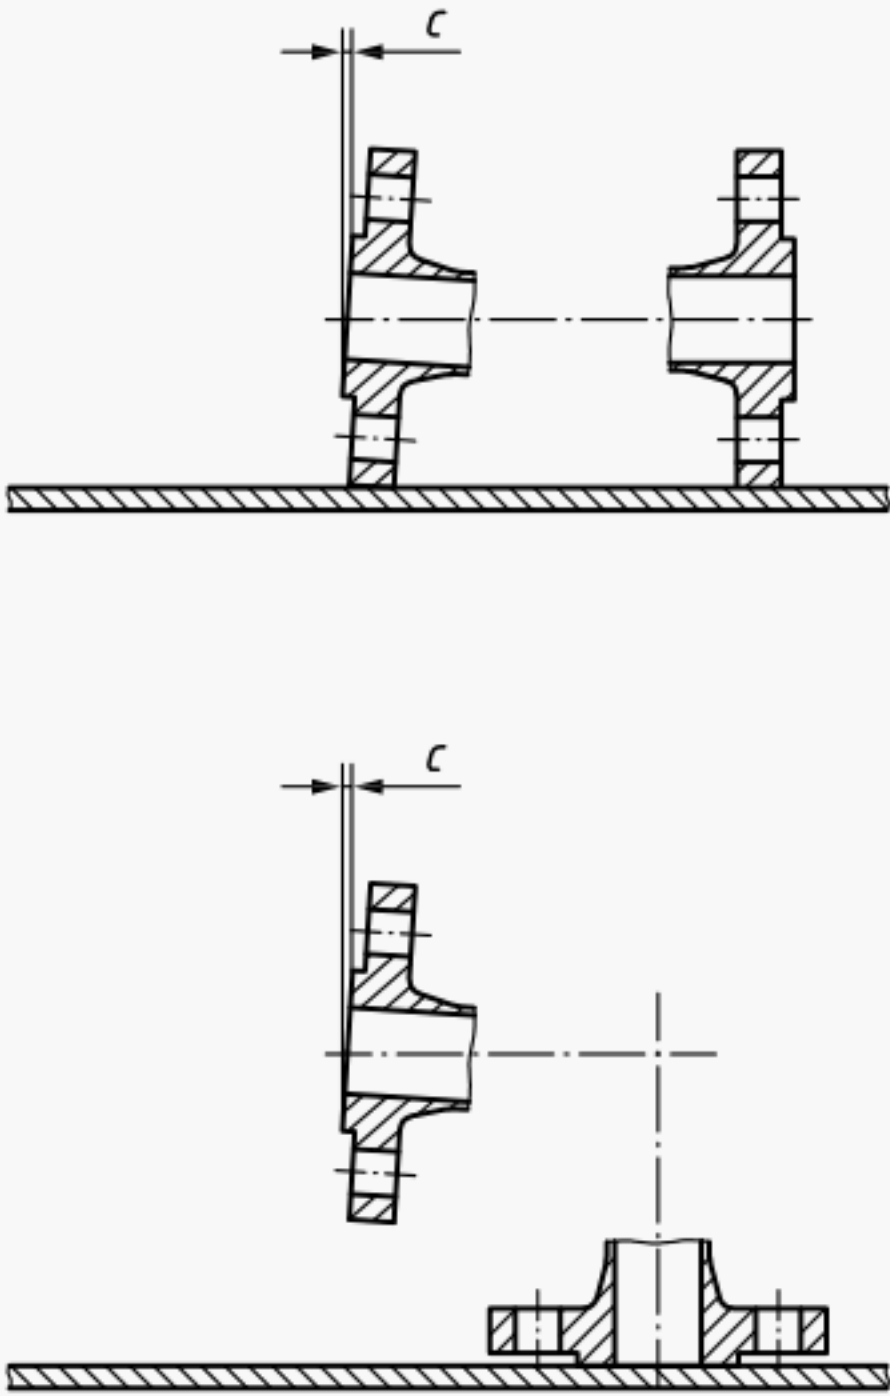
Tolerances on parallelism and perpendicularity
